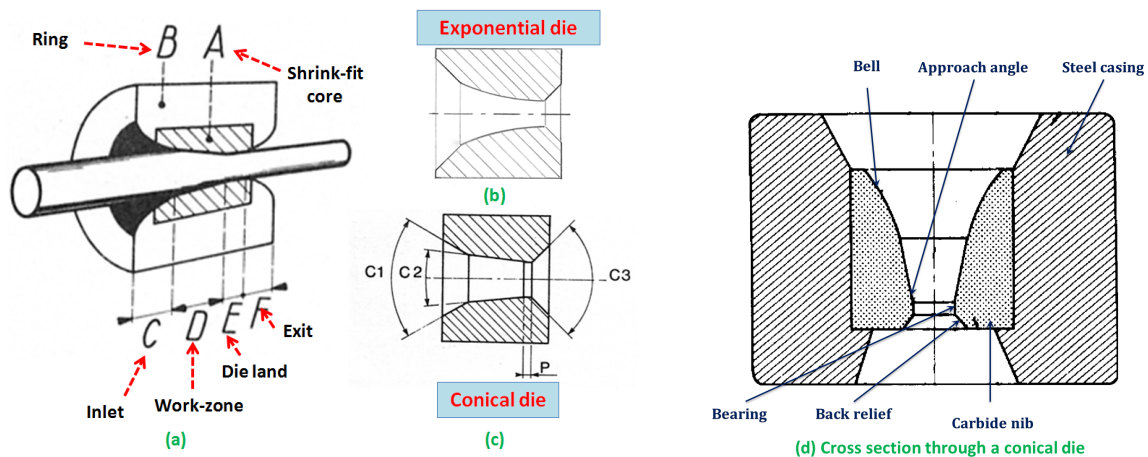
Drawing die (a) with different geometries: exponential die (b) and conical die (c). The cross section through a conical die is shown in (d)
